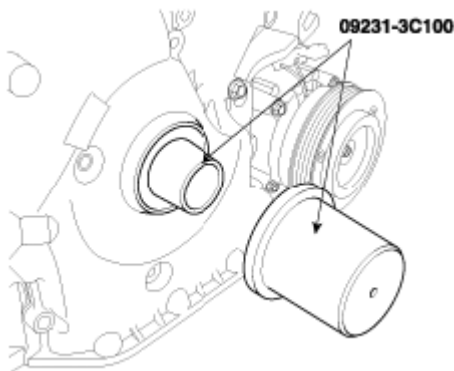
Installing Timing Chain Cover Oil Seal Using SST (09231-3C100)
